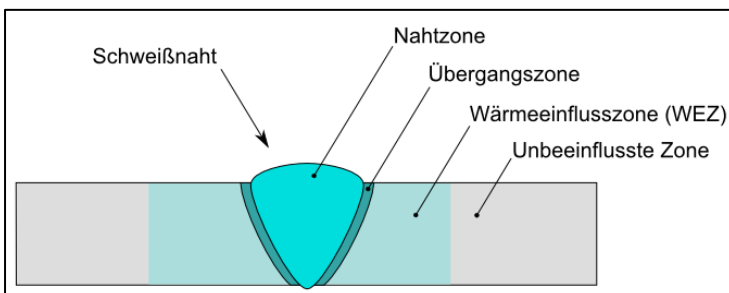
Schematic structure of a welded joint; Source: Maschinenbau-Wissen.de
